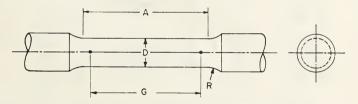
Standard 0.500-in. (12.7-mm) Round Tension Test Specimen with 2-in. (50.8-mm) Gage Length.
